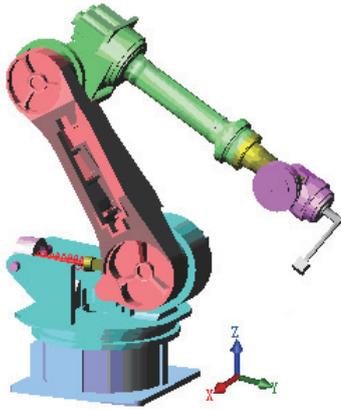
Multi-rigid-body model of Spot-welding robot
